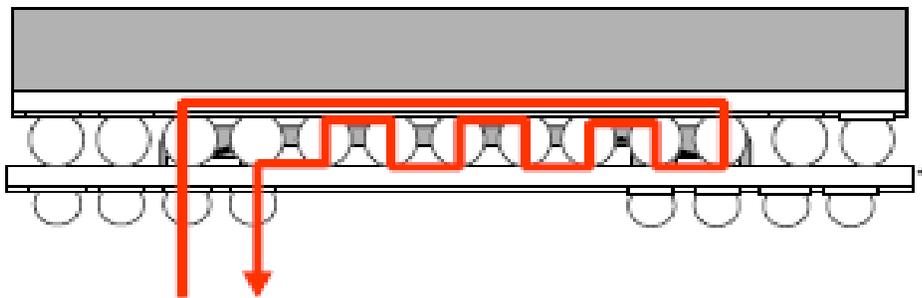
Schematic showing matching daisy chain net-lists on the bottom of the bottom package (PsvfBGA) and the PCB
